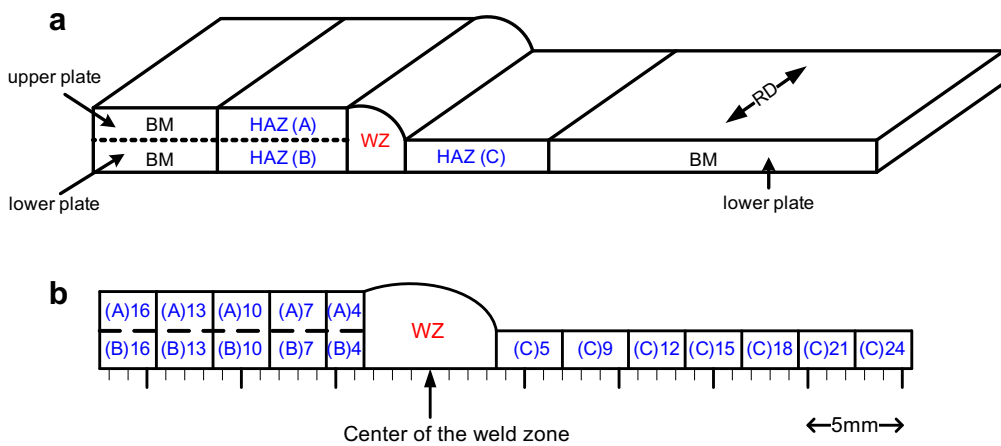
The welded DP590 sheet specimen for the continuous indentation test: (a) schematic view (b) enlarged cross-section view near the weld zone.
